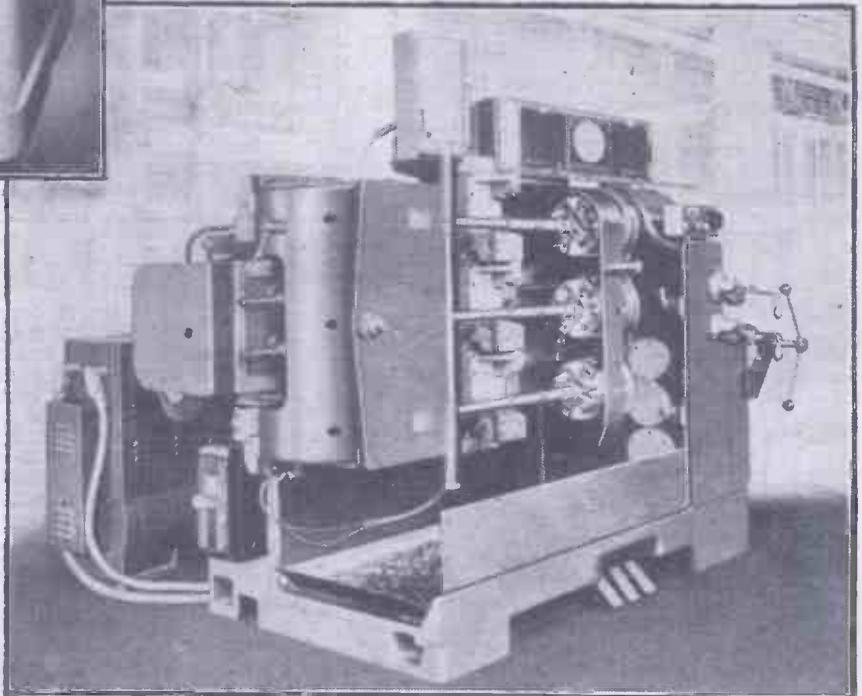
A Bullard three-spindle horizontal lathe (Buck and Hickman, Ltd.).
